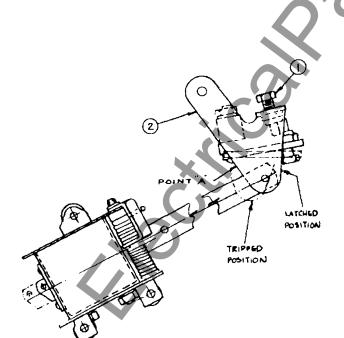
Magnetic Latch Trip Adjustment Type K-30005 and K-40005 Circuit Breakers
